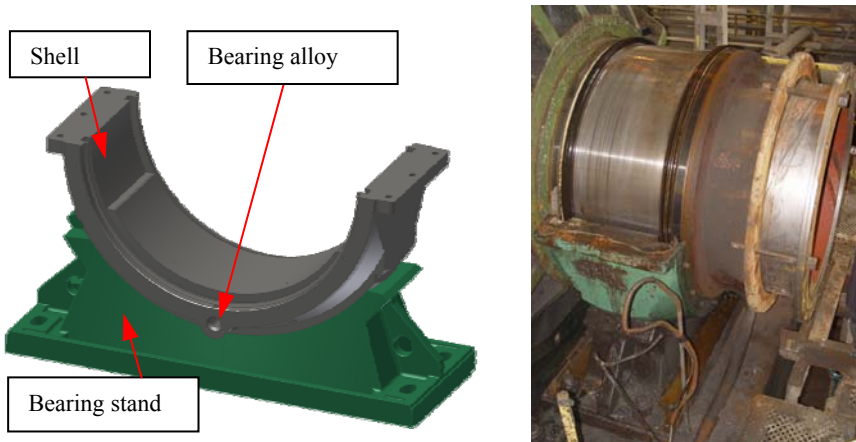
A 3D computer model of the bearing stand with shell fitted for an MSZC type mill (left) and a photo of the bearing with the journal fitted (right) [L. 2, 14]
